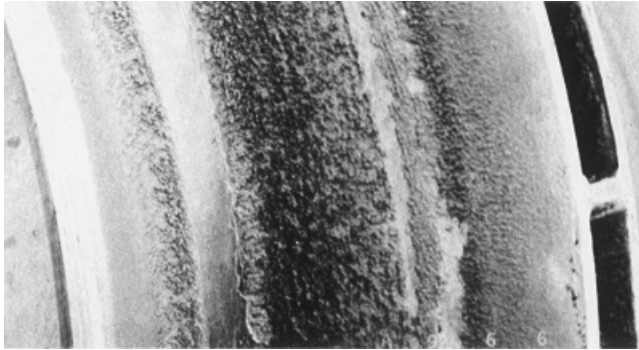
Centrifugal compressor impeller, showing fouling deposits. (*Turbomachinery International, Norwalk, Conn.*)
